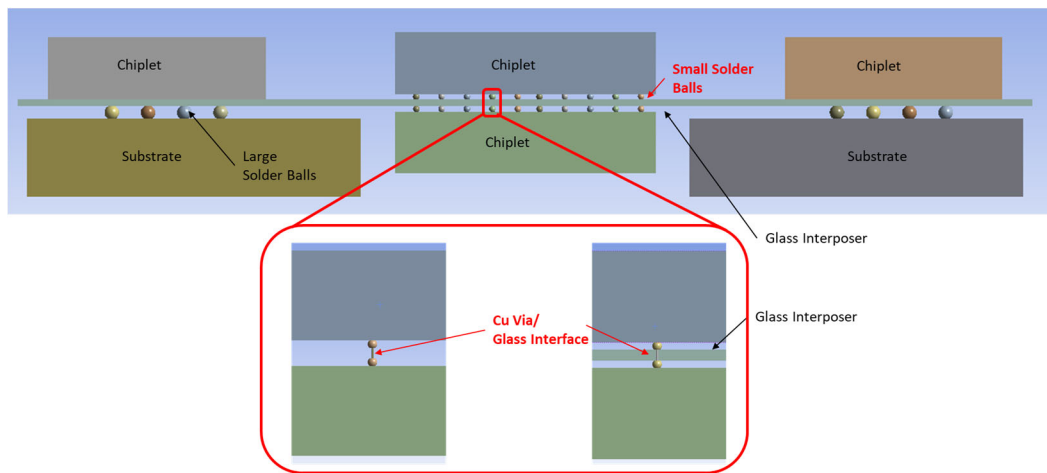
Schematic representation of the glass interposer package with zoom-in view of Cu Via and small solder balls in the inset
